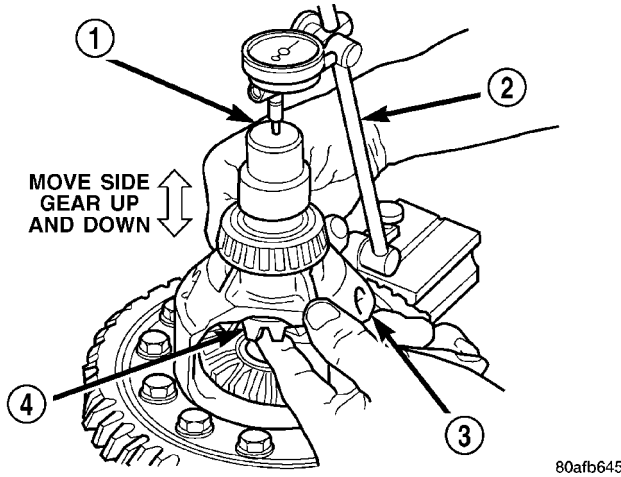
Checking Side Gear End Play (Extension Housing Side)
